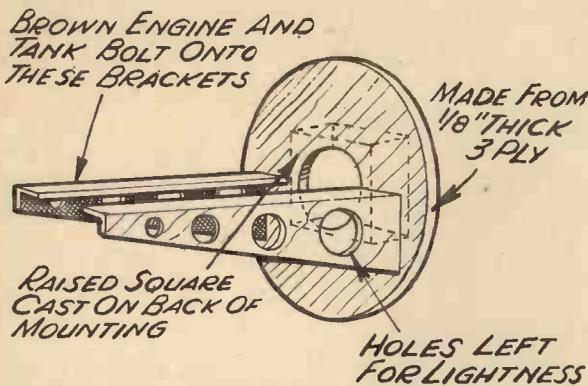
Alternative engine-mounting bracket. The method of constructing the pattern for casting.
